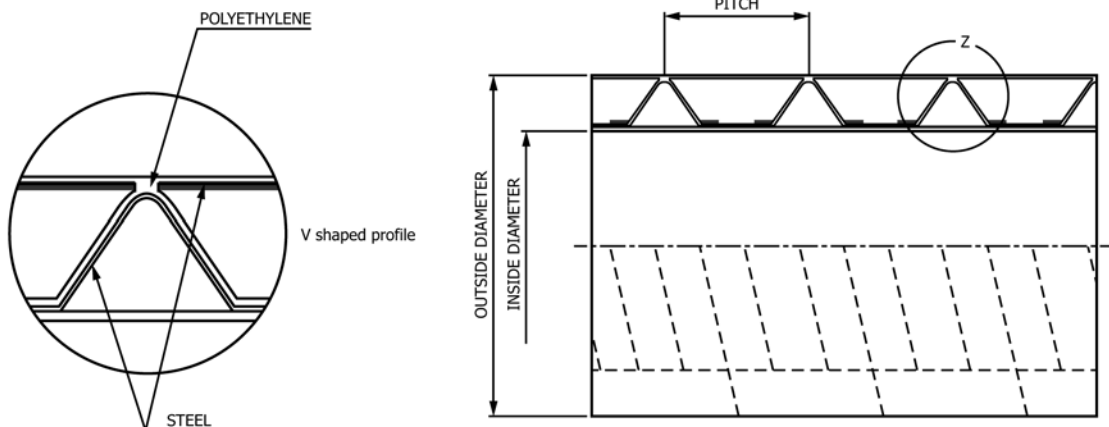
Triple-Wall Steel Reinforced Corrugated Polyethylene Pipe – Type IIA
